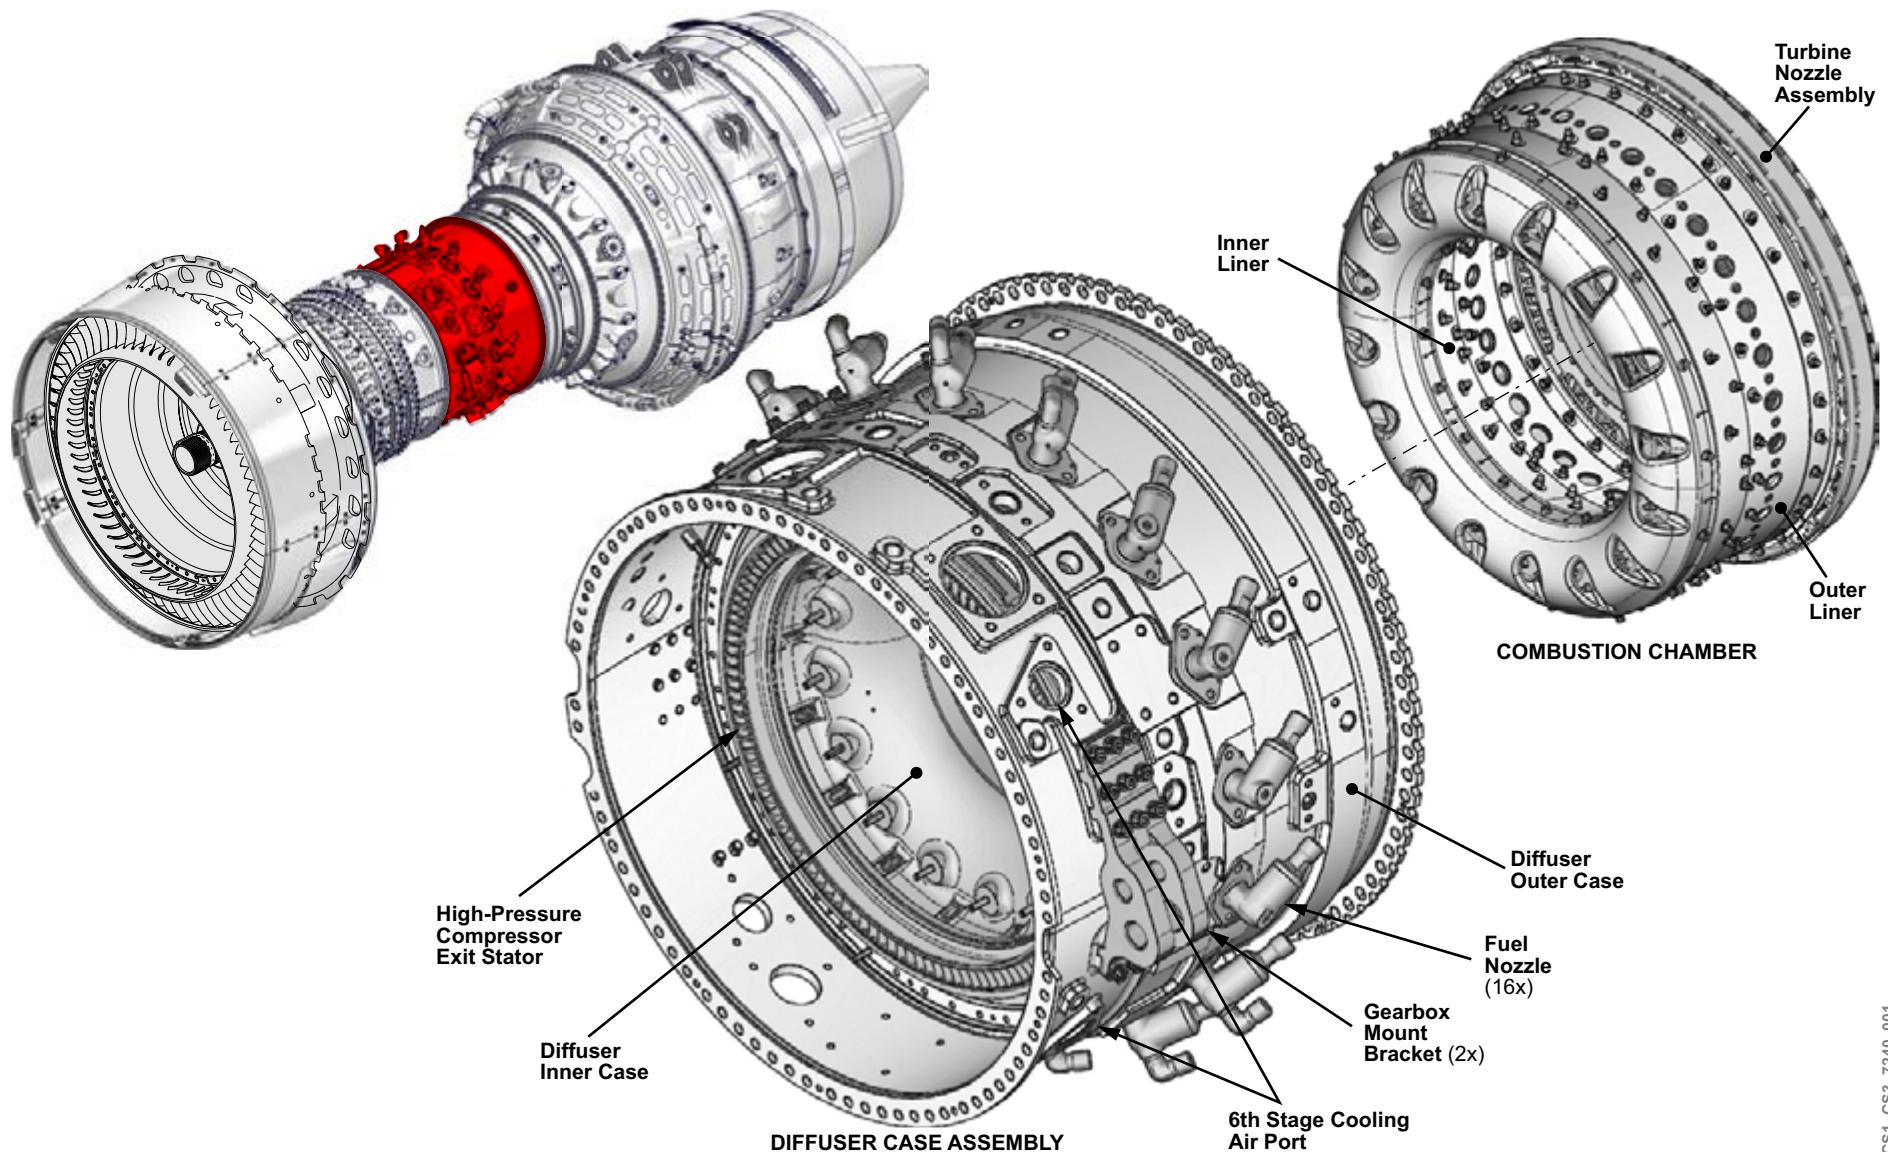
Diffuser, Combustor, and Turbine Nozzle Assembly
